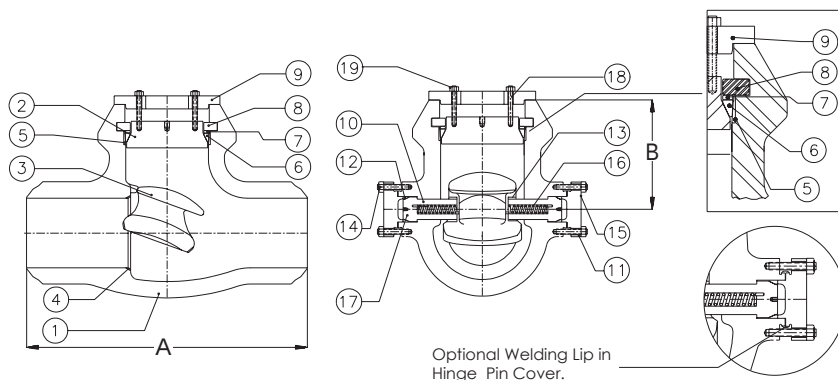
B Tilting Disc Check, Butt Weld Ends
